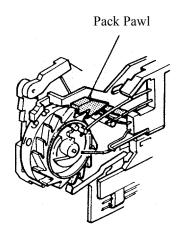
Pack Pawl Engaging Counter Wheel Ratchet
